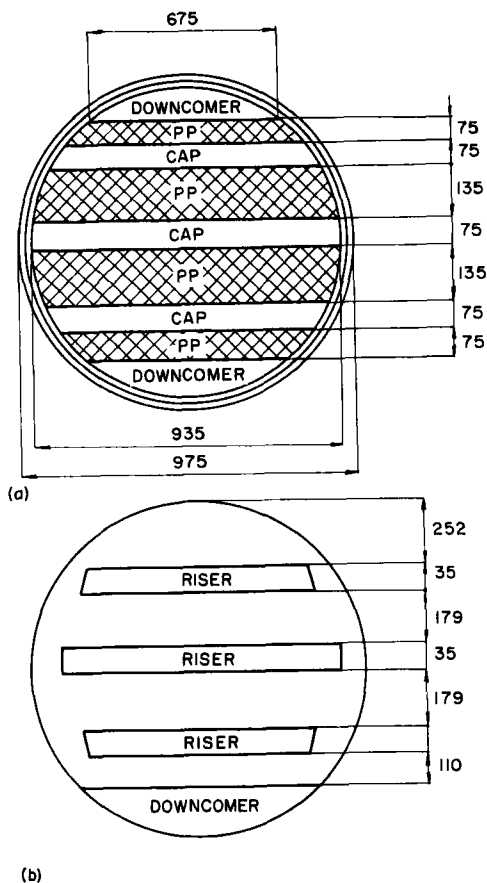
APV-West tray, general layout; all dimensions in millimeters: (a) upper part of tray (PP, perforated plate section); (b) lower part of tray.
